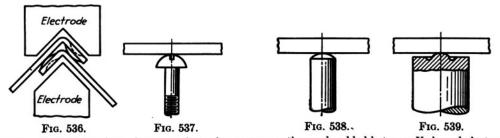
Design of embossed corners, formed over one another and welded between V-shaped electrodes.
